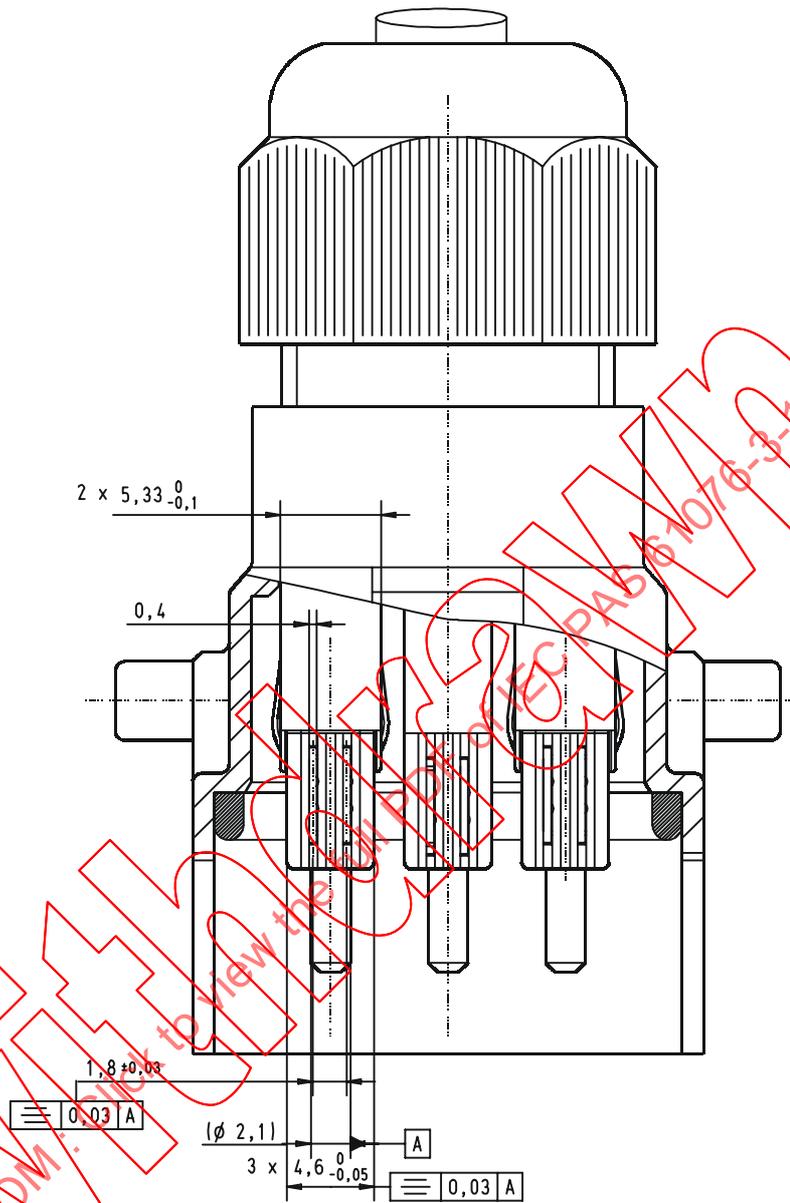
(cont.) – Free connector with housing, shielding, insulation body and contacts
